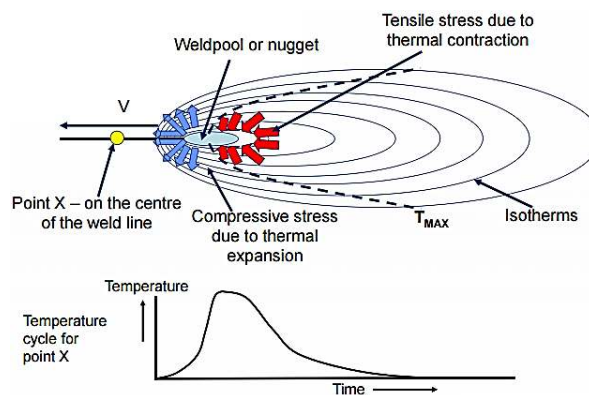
Schematic of development of tensile residual stress during fusion welding [112].
